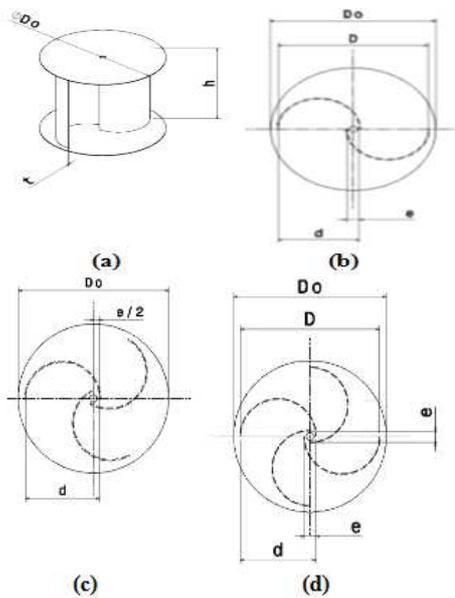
Design of wind turbine model (a) and the cross section of turbines with (b) two blades (c) three blades, and (d) four blades
